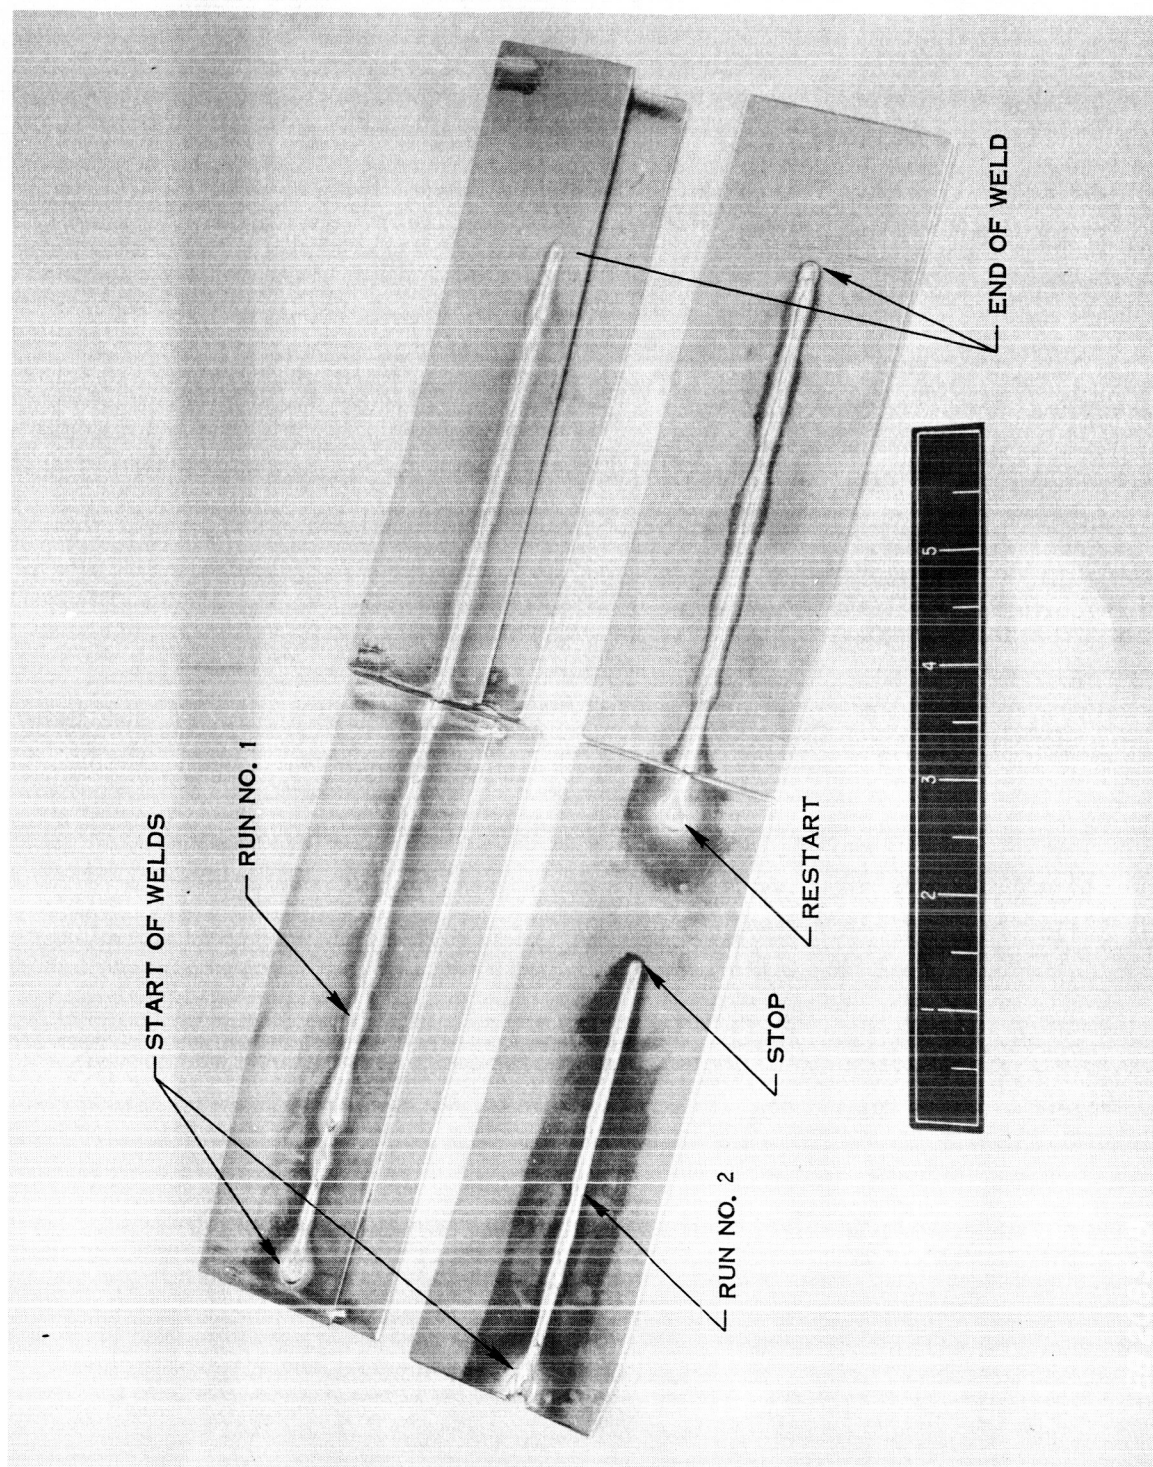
ELECTRON BEAM WELDS MADE BY HAND-HELD GUN
